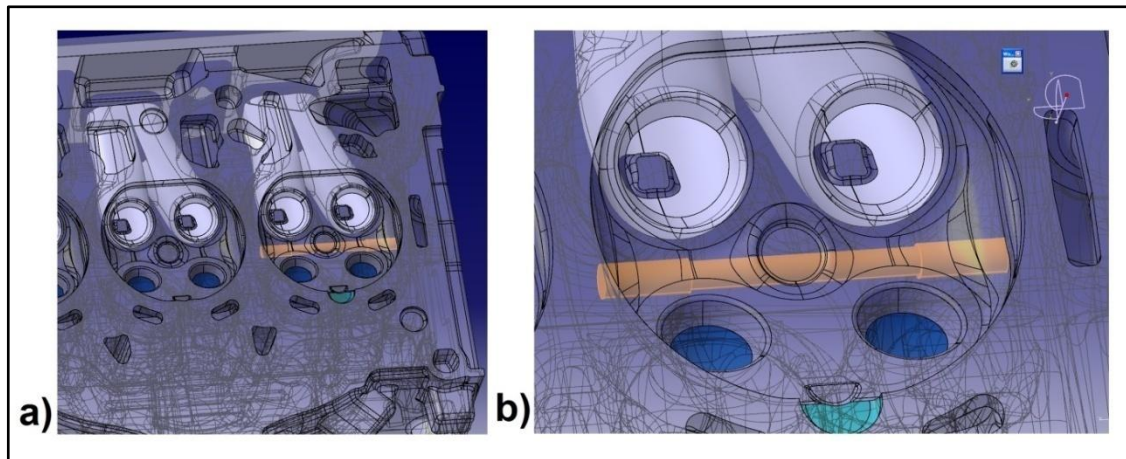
a) CAD picture of $d_0=5$ mm tensile test bar under the combustion chamber, b) CAD picture of $d_0=5$ mm tensile test bar under the combustion chamber with zoom.
